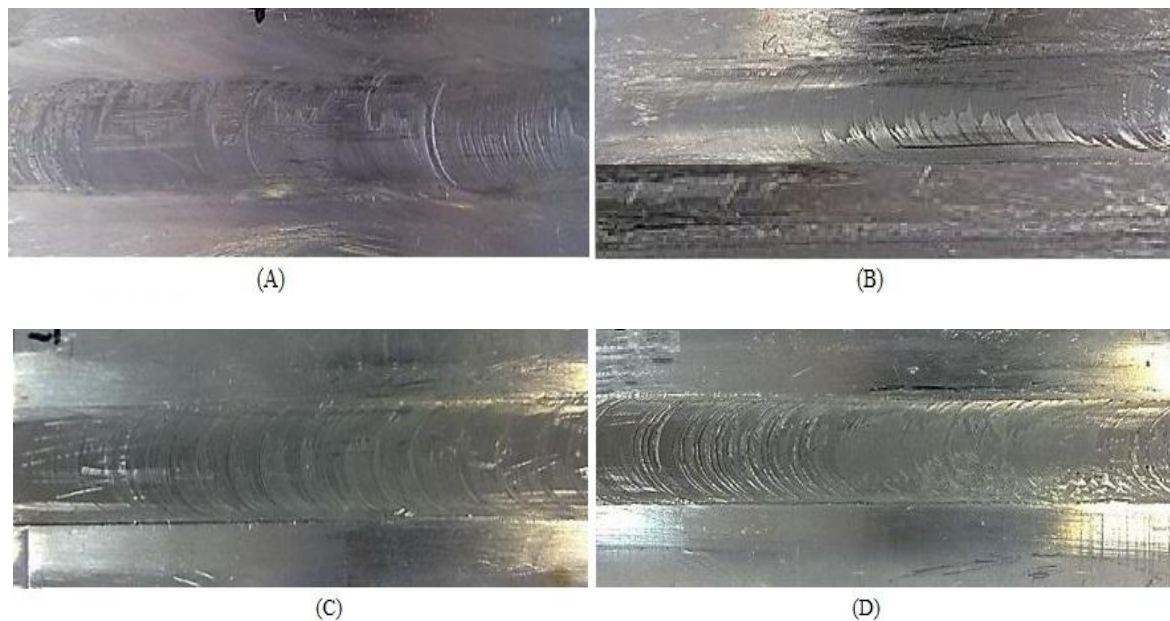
Weld samples made with tools with (a) an unthreaded cylindrical pin, (b) a threaded cylindrical pin, (c) an unthreaded conical pin, and (d) a threaded conical pin
